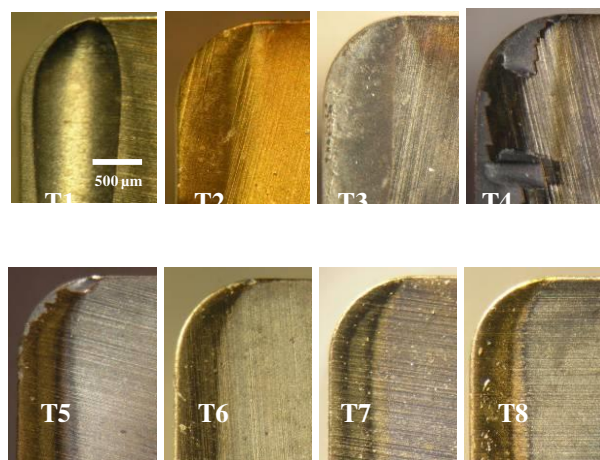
Optical micrographs of the rake surface of uncoated (T1) and different coated turning inserts (T2 to T8) after machining ($V_c=230$ m/min, $f=0.2$ mm/rev, $a_e=2$ mm) followed by the removal of built-up material
